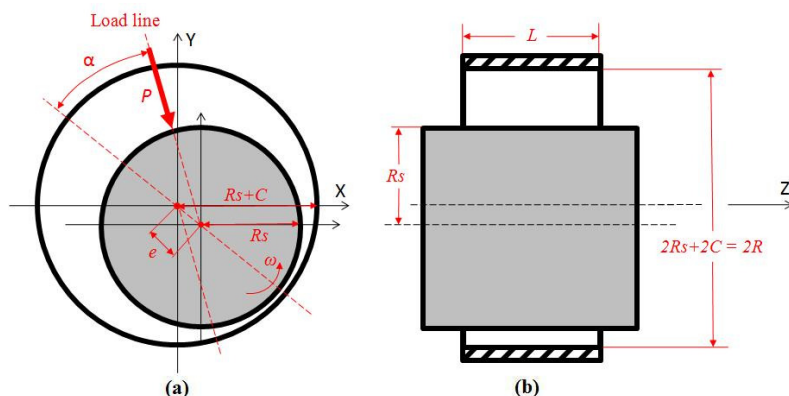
Bearing parameters and reference system. (a) Front view; (b) Side view.
